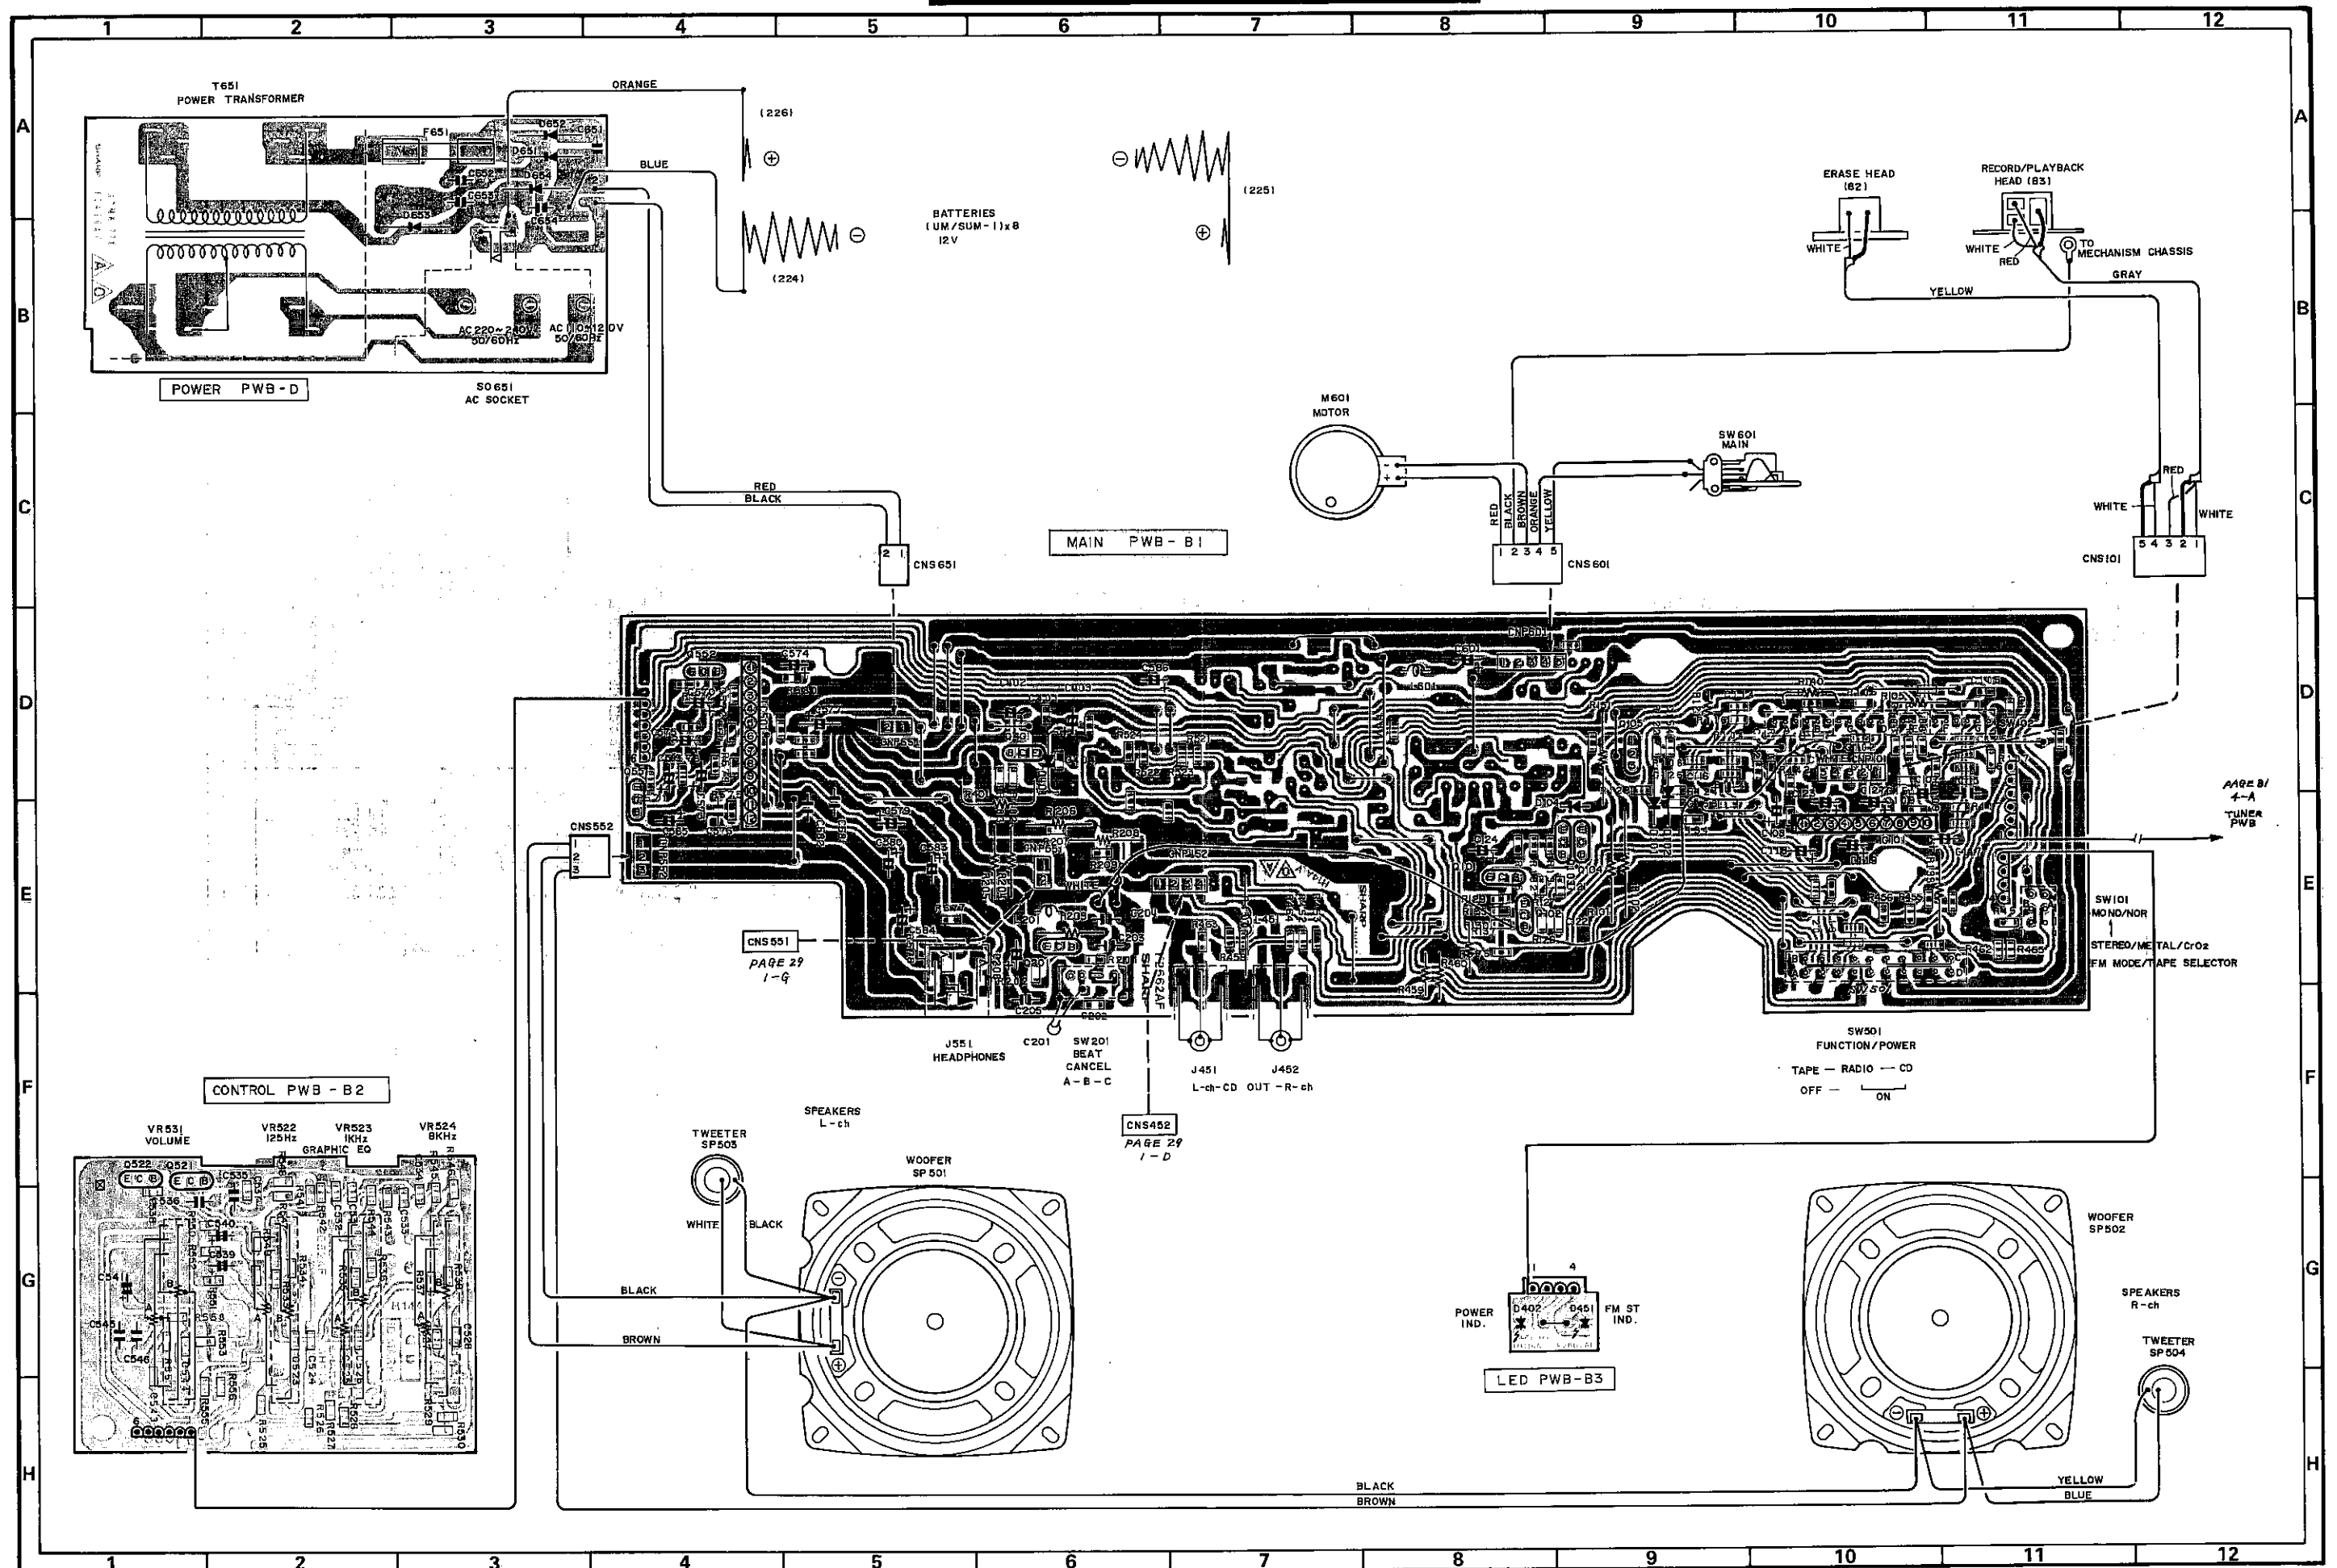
WIRING SIDE OF P.W. BOARD (1/3)
